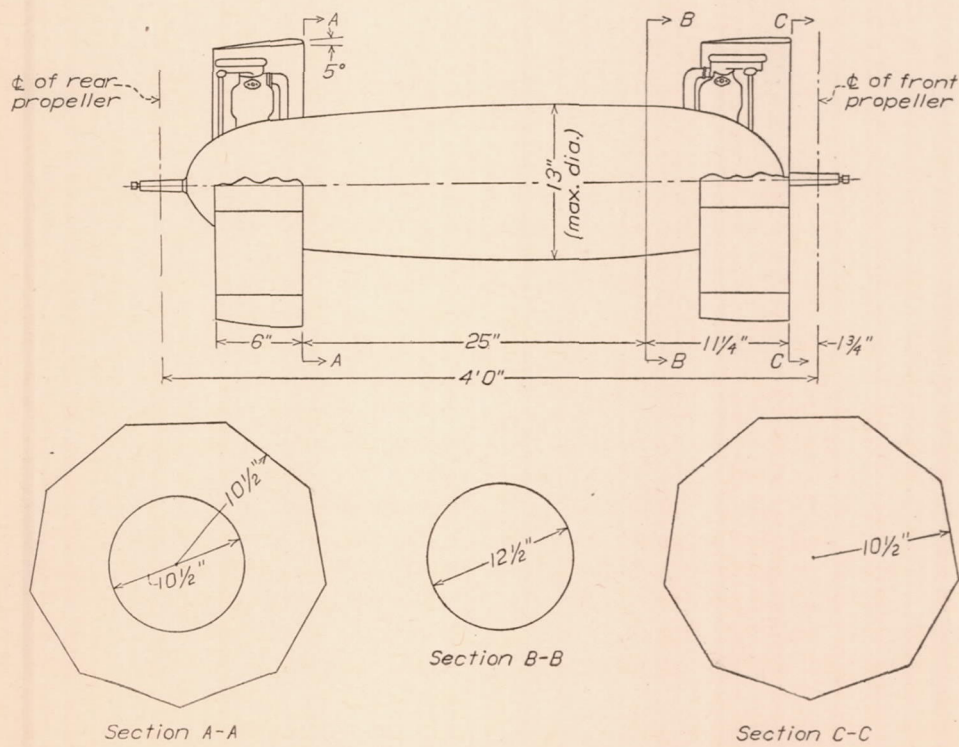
Small nacelle and engine assembly, propeller spacing 1 diameter.
